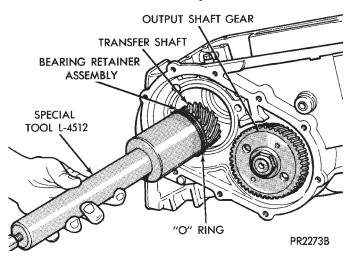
Remove or Install Transfer Shaft and Bearing Retainer Assembly Using Tool L-4512
